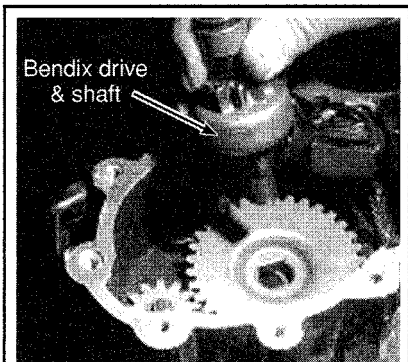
Remove the bendix drive and shaft (pinion gear assembly)..
